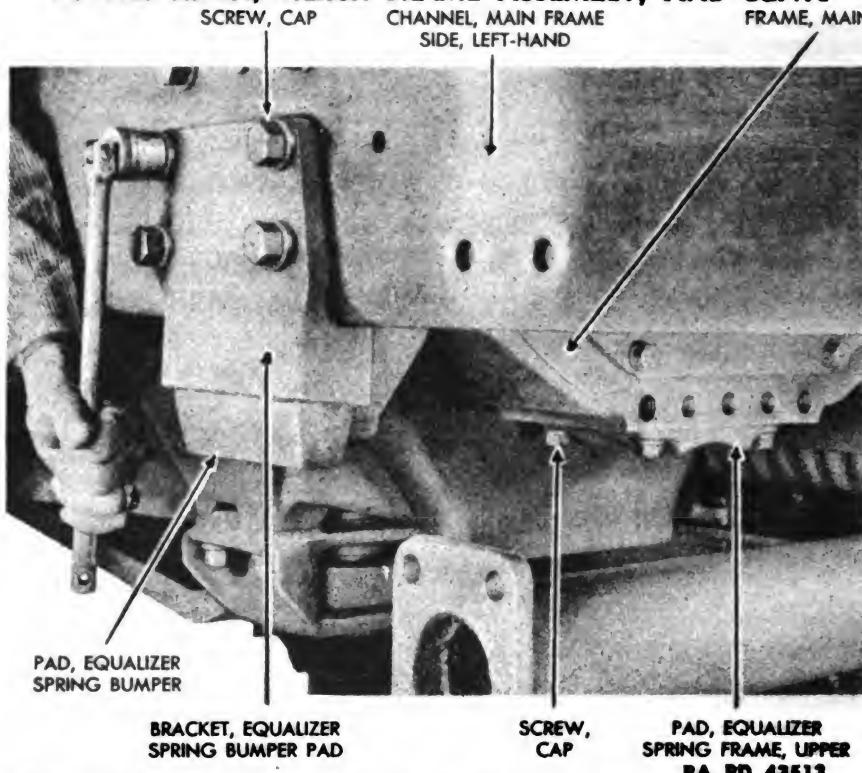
Equalizer Spring Bumper Pad Bracket Removal
